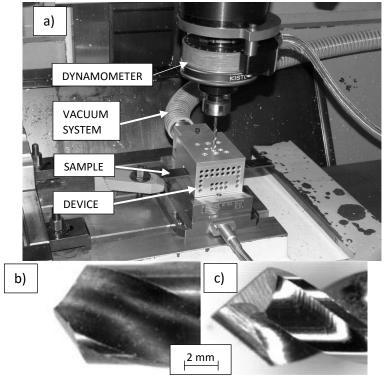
a) Configuration used in the machining center B500 Kondia to carry out drilling tests; b) Drill-A. HSS drill (118°); c) Drill-B: Custom HSS drill (80°) [2].
